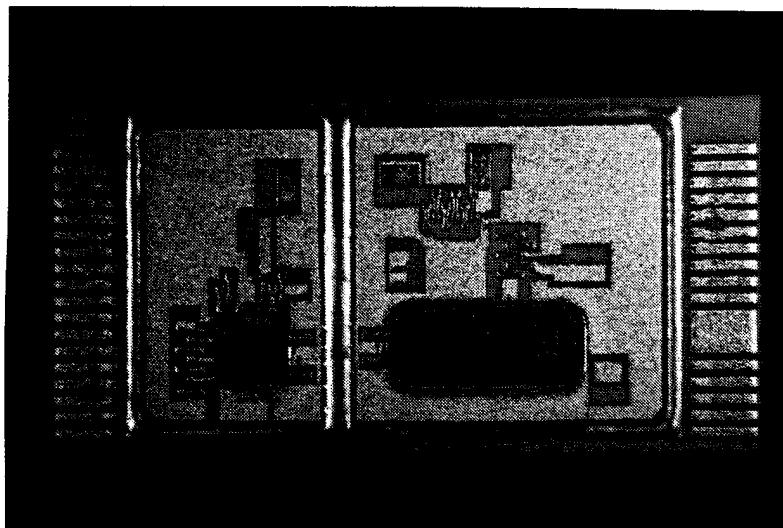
An optical transceiver package (0.54" x 1.1") fabricated using LTCC-M substrate technology.
